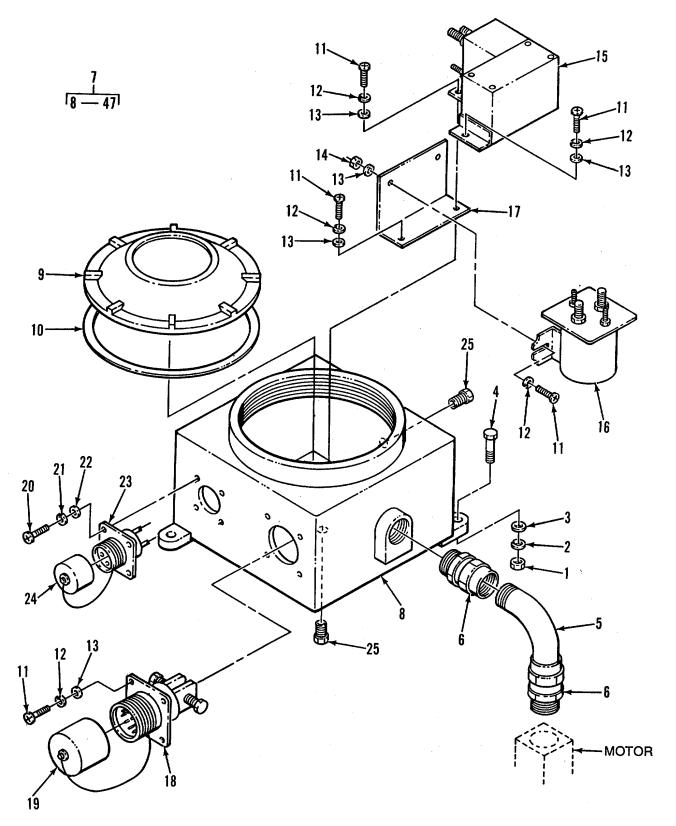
Junction Box Assembly (Sheet 1 of 2)
